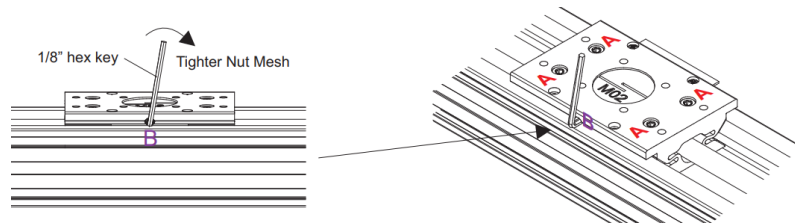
Adjustment drawings retrieved from the BiSlide assembly document
